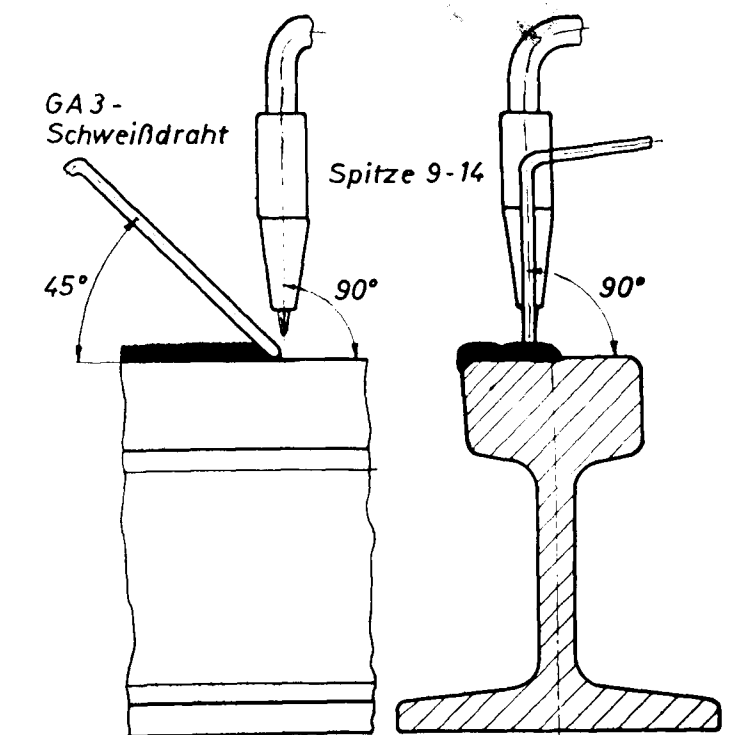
Position of torch and wire when executing built-up welding on rails
